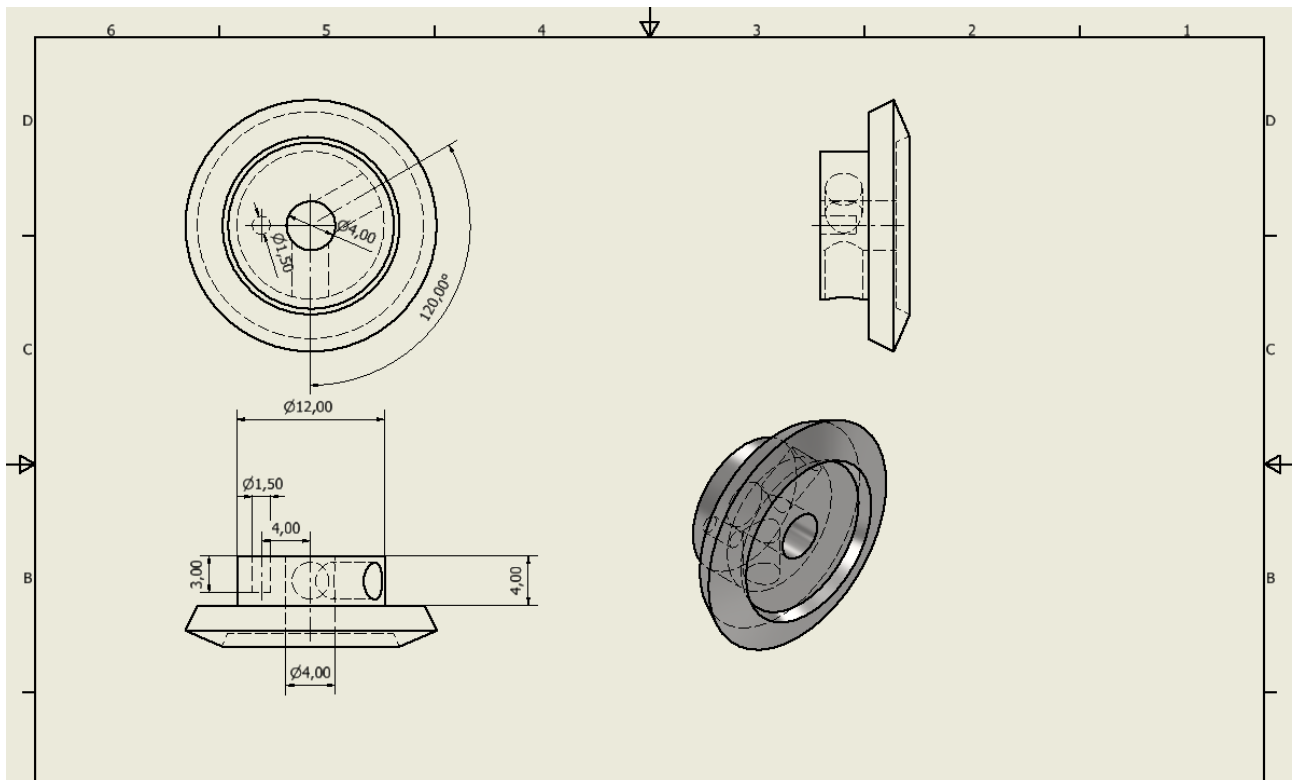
technical drawing illustrating the machining operations on the four bevel gears
